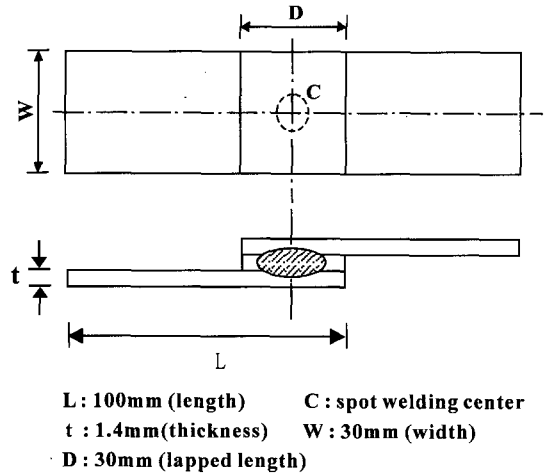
Dimensions and configuration for spot welding specimens
